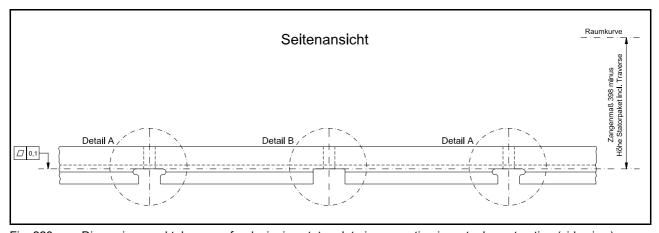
Dimensions and tolerances for designing stator plate incorporation in a steel construction (side view)
